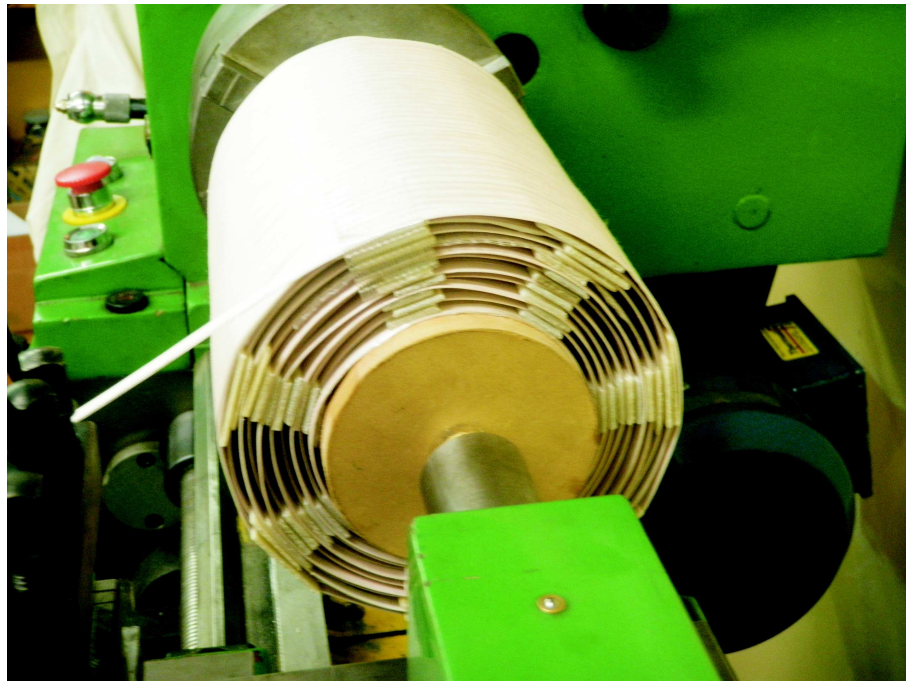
Copper inside winding on lathe with composite fibreglass spacers
